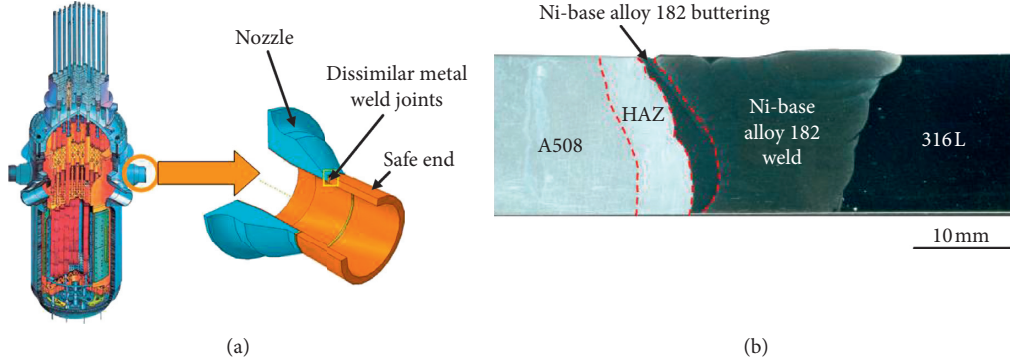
Dissimilar weld joints connecting the RPV nozzle and the hot-leg pipe in NPPs: (a) weld joint position and (b) sectional view of material composition of the weld joint.
